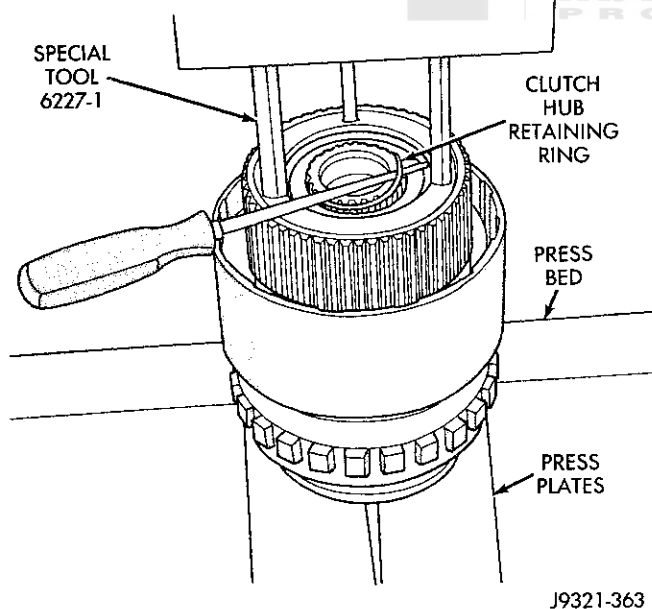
Direct Clutch Hub Retaining Ring Removal
